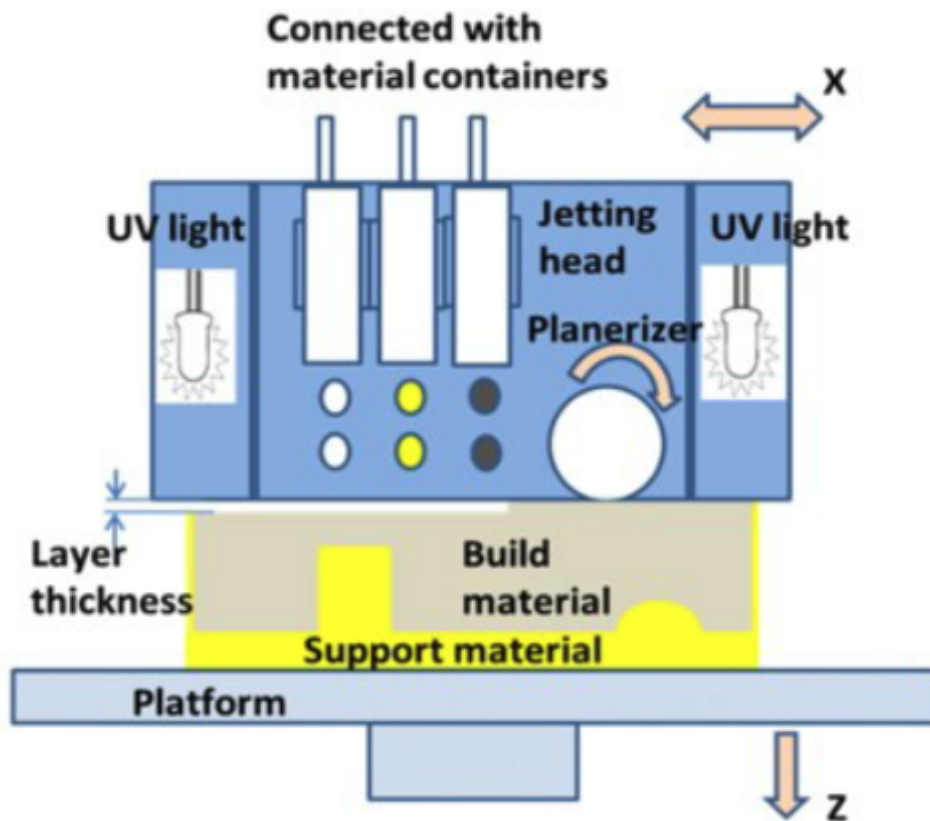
Working mechanism of a multi-material jetting 3D printer [5].
